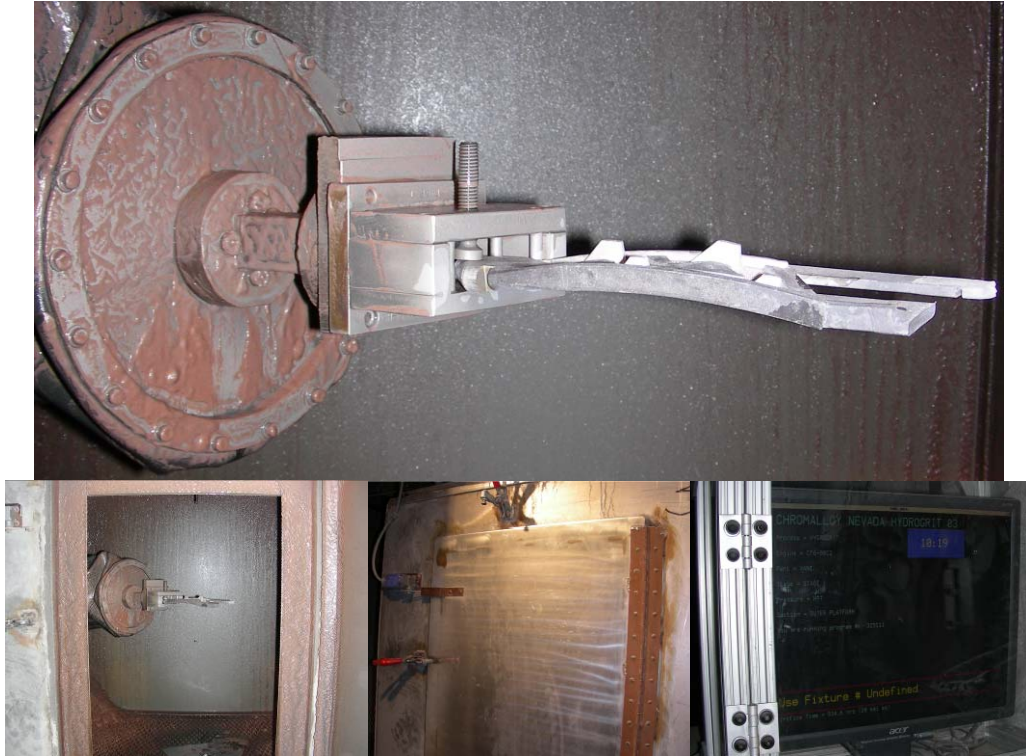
A typical abrasive water jet machine for metal-mold reaction layer removing
